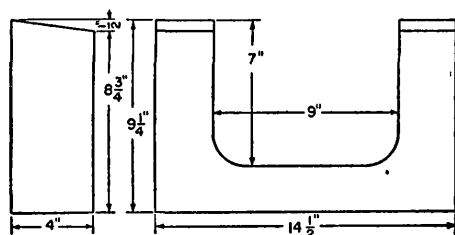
Dimensions for making an engine support saddle. 1950-52
